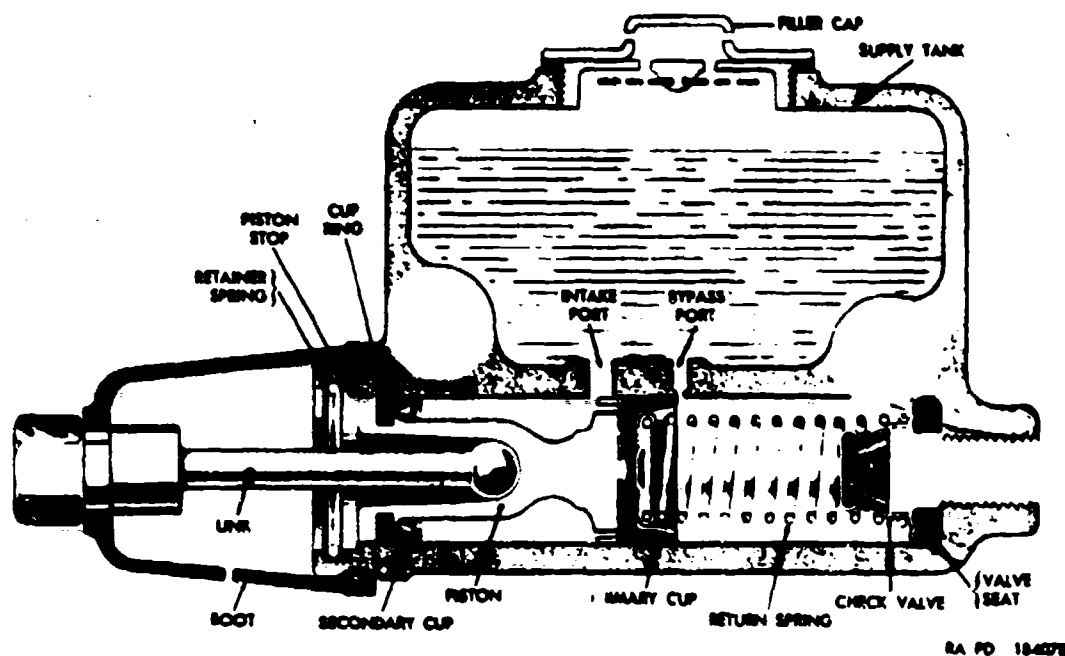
Master hydraulic brake cylinder—cross sectional view.
